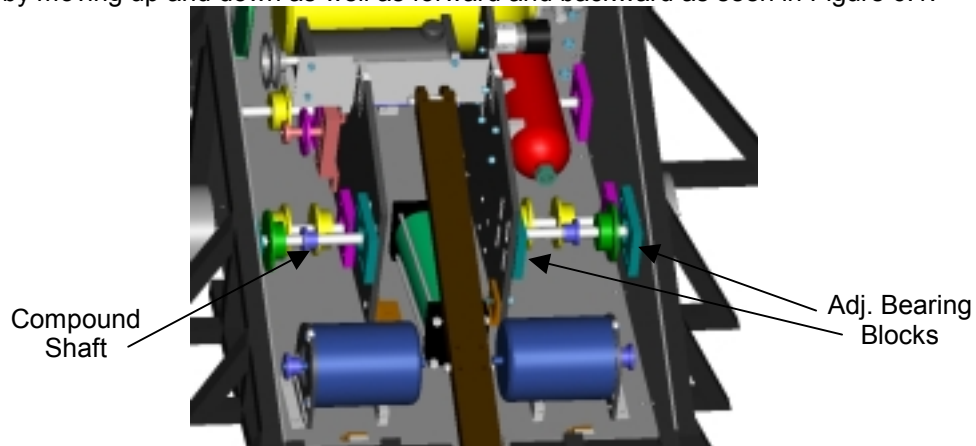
Adjustable Bearing Blocks and Compound Shaft
